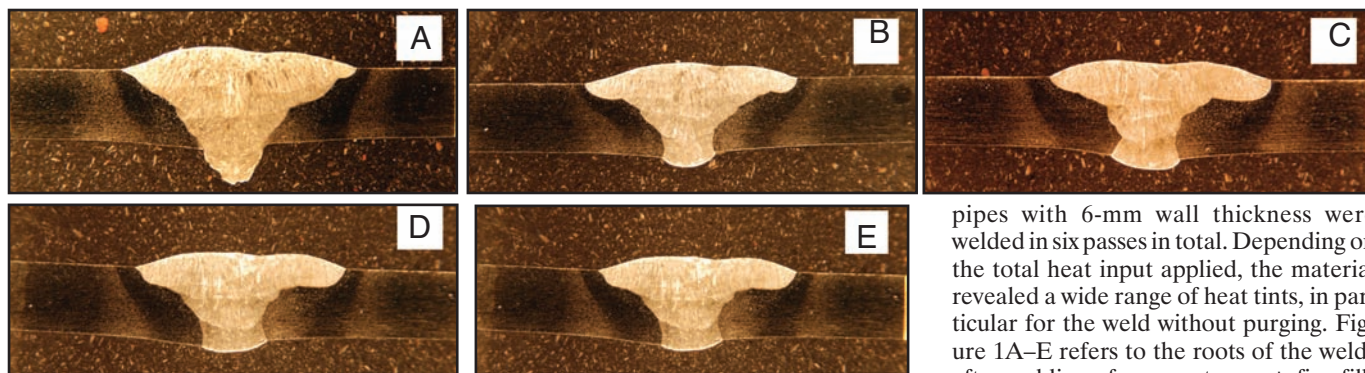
Photomacrographs of welded 304H pipes. A — 04H NP; B — 04H A; C — 04H N; D — 04H AN; E — 04H NH.
